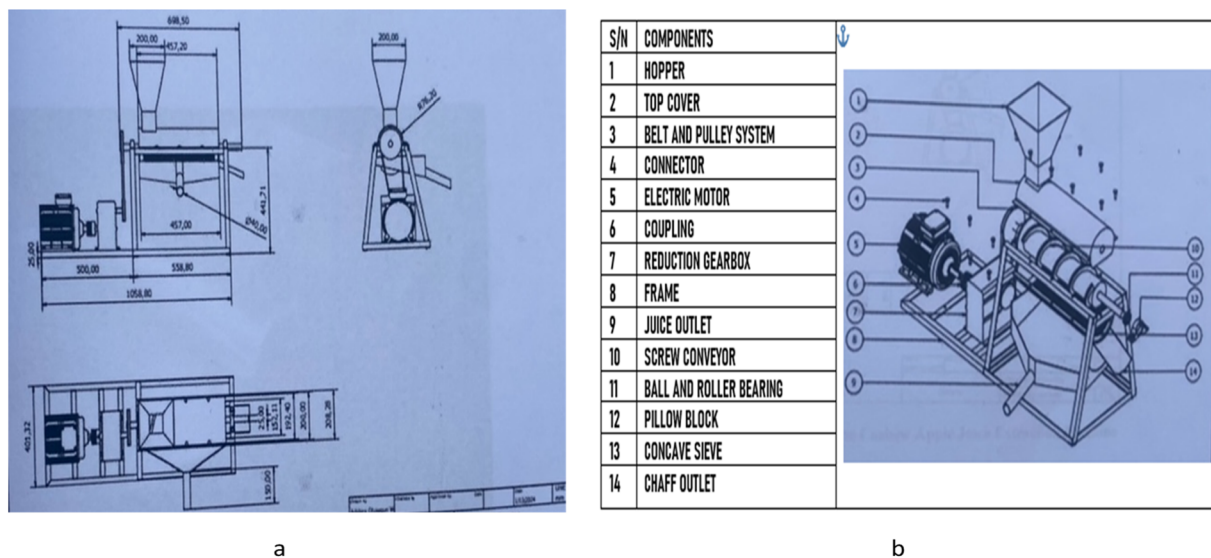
(a) Orthographic drawing of the cashew apple juice extractor. (b) Exploded drawing of the cashew apple juice extraction machine.
